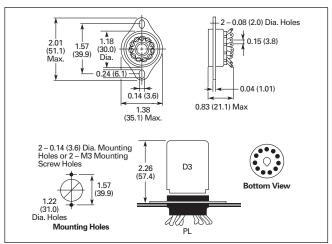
D3PA5 — Approximate Dimensions in Inches (mm)
